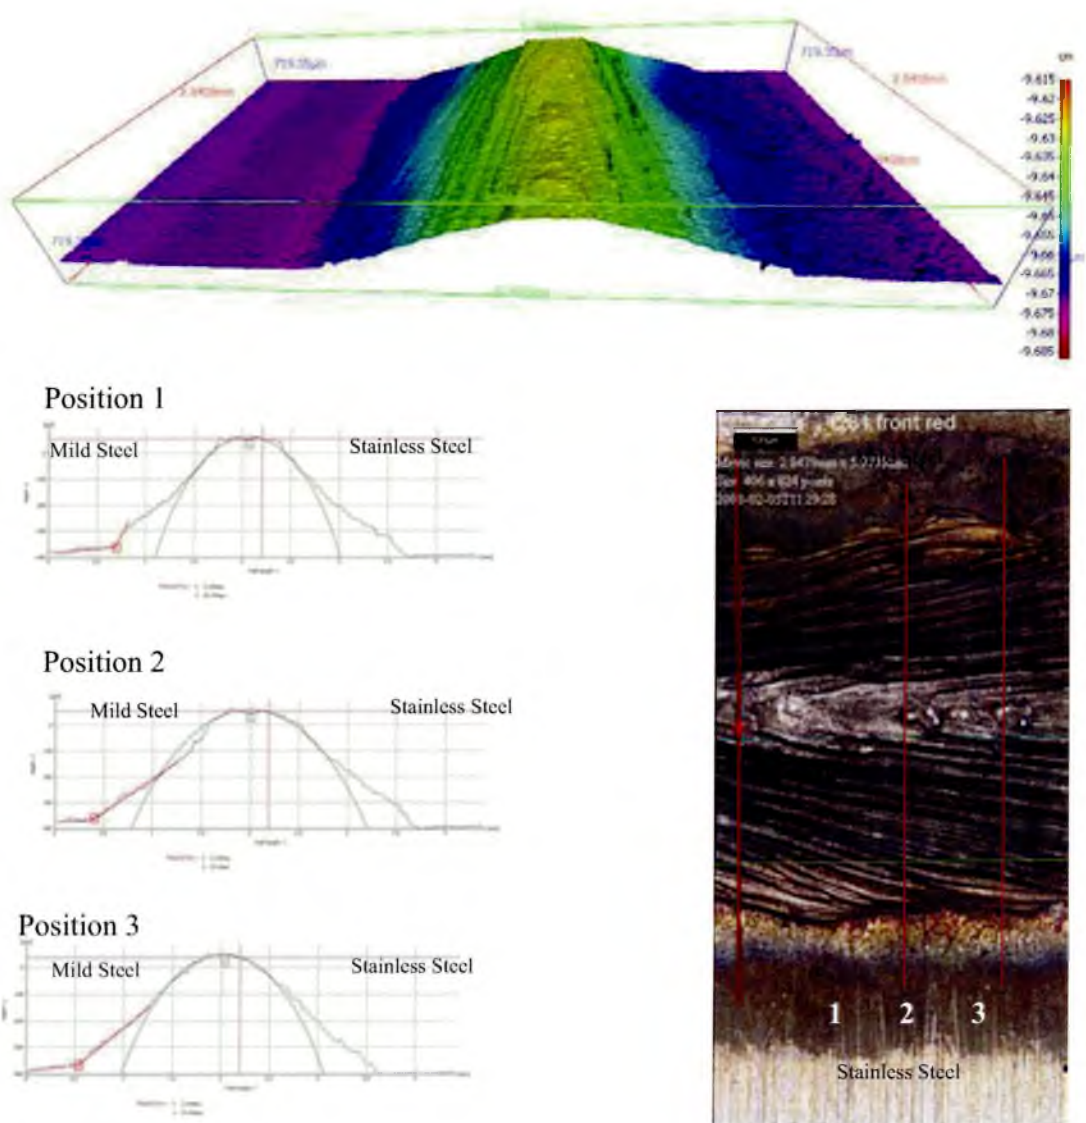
IFM 3D surface image and surface profiles for the front of the weld bead of sample F2.8.1
